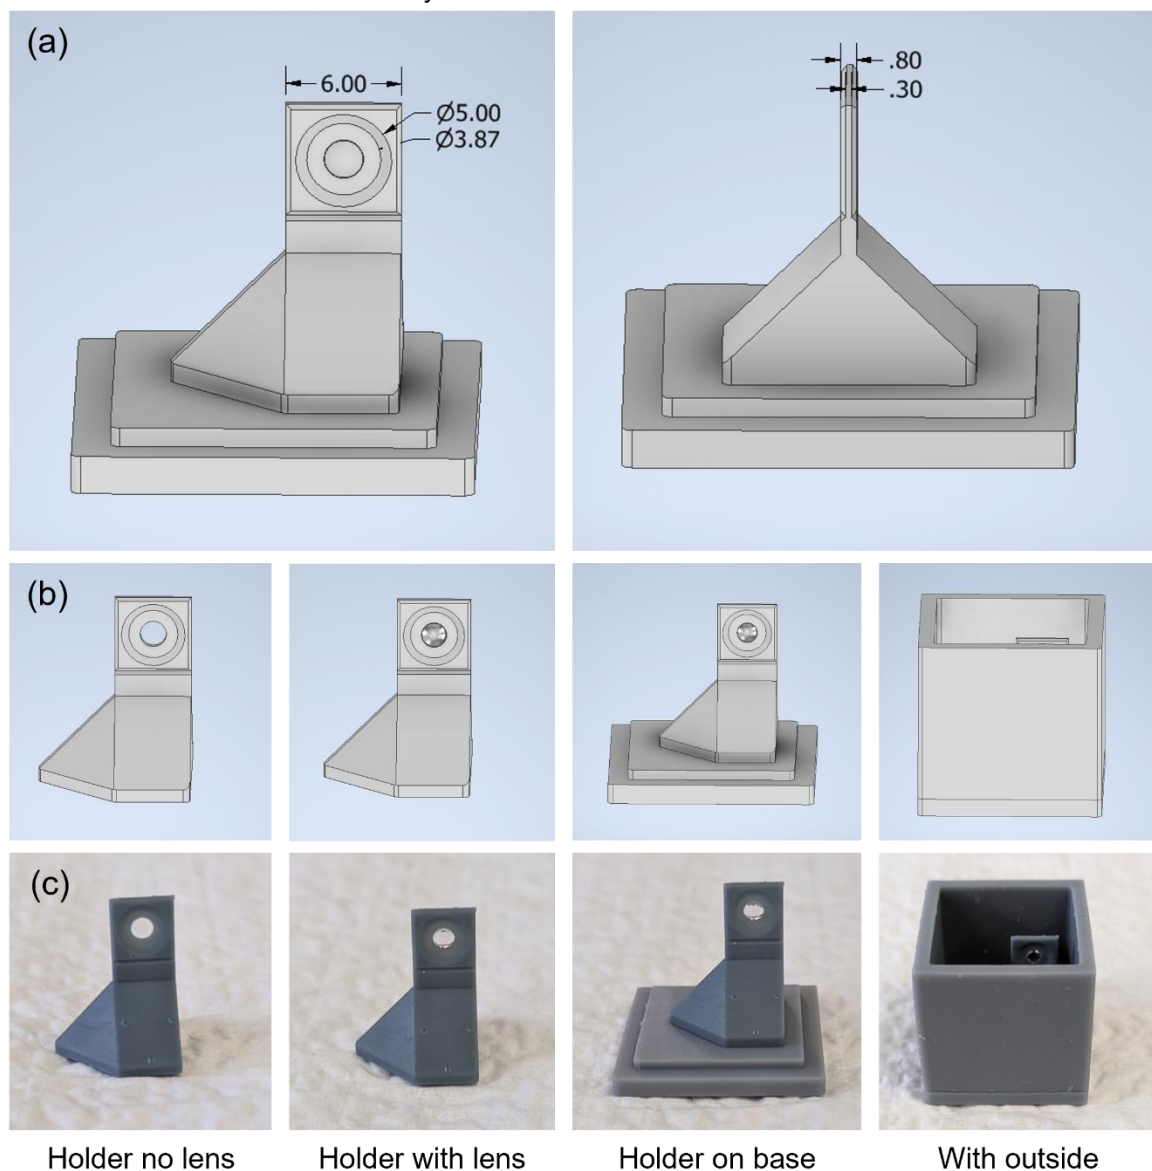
One part mould design. (a) Design with dimensions for carrier material. (b) Inventor design of design. (c) 3D printed parts for one part mould.
